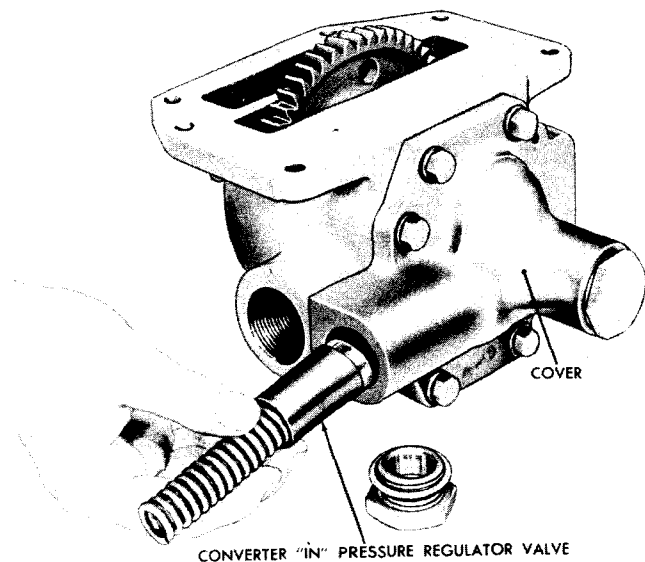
Removing (or installing) converter "IN" pressure regulator valve
